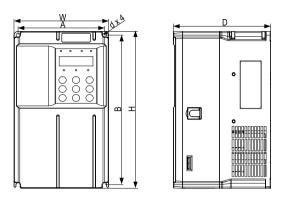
Overall and mounting dimensions of GE200T0.4GB to GE200T15GB and Ge200-2T0.4GB to GE200-2T7.5GB
